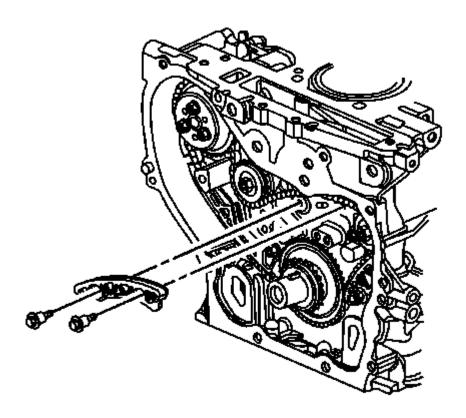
Upper Balance Shaft Drive Chain Guide Bolts And Guide Courtesy of GENERAL MOTORS COMPANY
